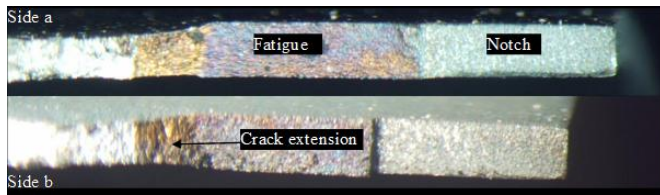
FRACTURE SURFACES FOR BOTH SIDES OF THE OF A PLT SPECIMEN AFTER FRACTURE TOUGHNESS TESTING DEPICTING REGIONS OF FATIGUE PRE-CRACK AND ACTUAL CRACK PROPAGATION DURING LOADING
